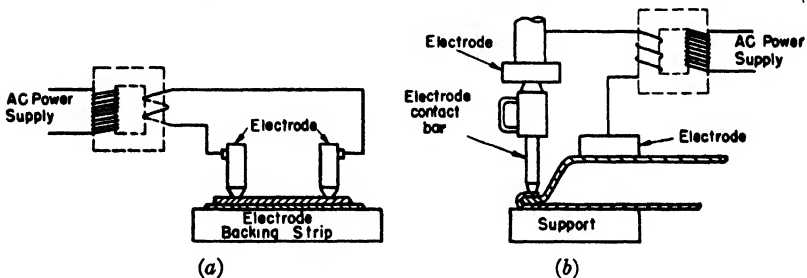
Special methods of spot welding. (a) Multiple welding. (b) Welding without surface marking.
